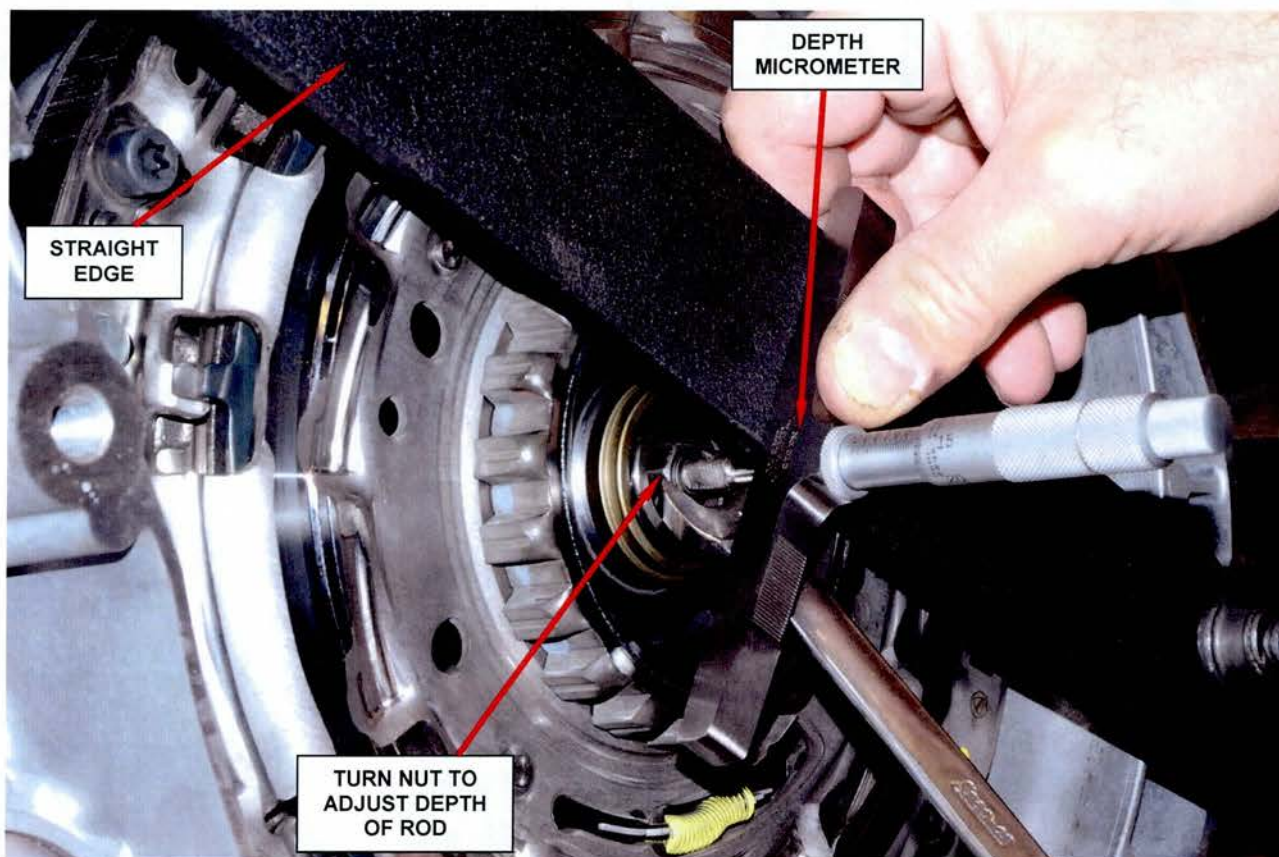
Adjust the Slave Cylinder Rod Depth to the Original Depth Measured in Step 40
